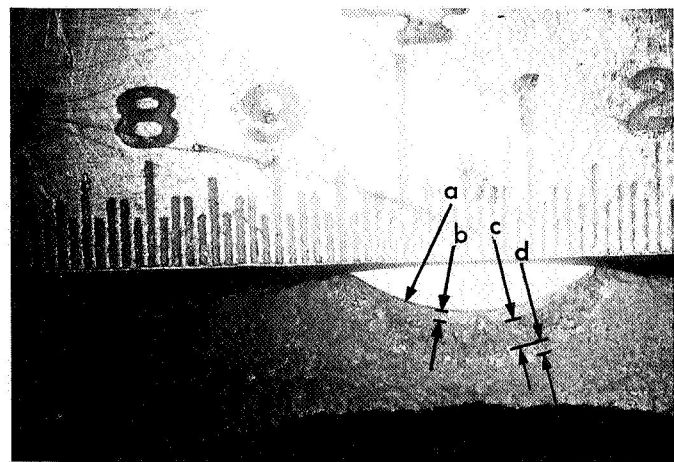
Fracture section of Inconel 718 vessel wall showing: (a) initial EDM notch, (b) cyclic fatigue crack extension, (c) flaw growth, (d) cyclic marking
